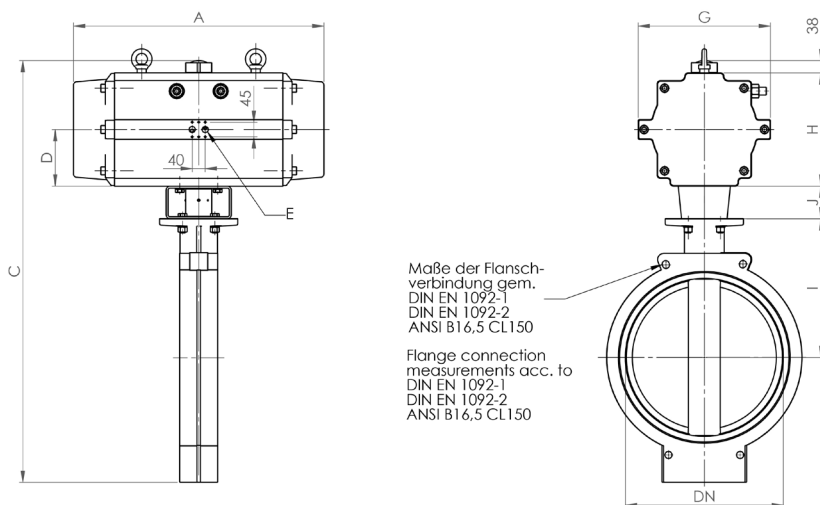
Dimensional drawing Type PZR with bar-actuator type GD/GS-300-400
